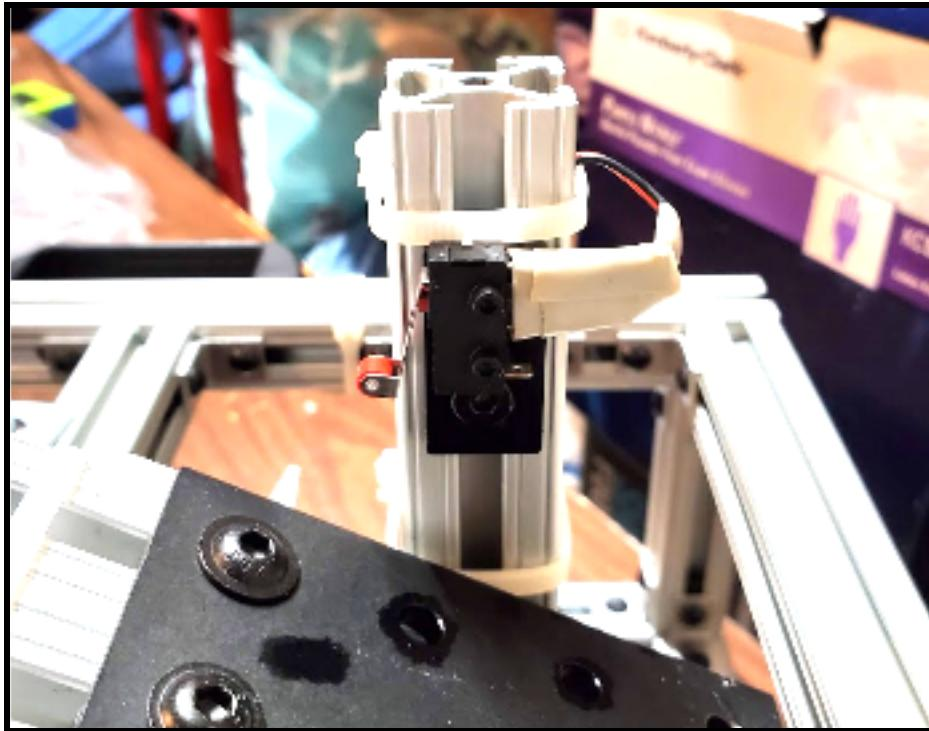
Example of how the absolute limit switch should be set up at the back of the machine.
